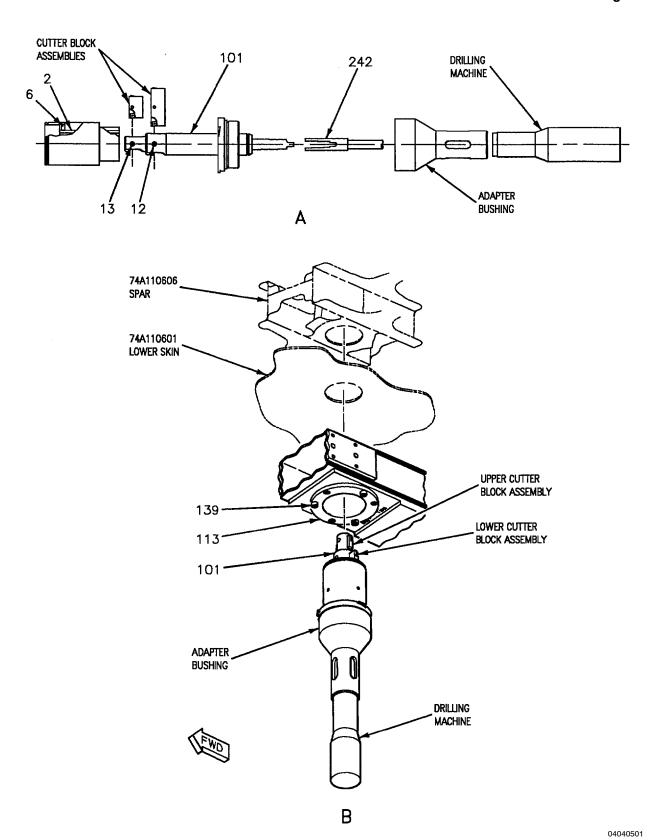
Boring Structure/Splice Fitting, Installation and Boring of Inboard Pylon Post Bushings (Sheet 1)
